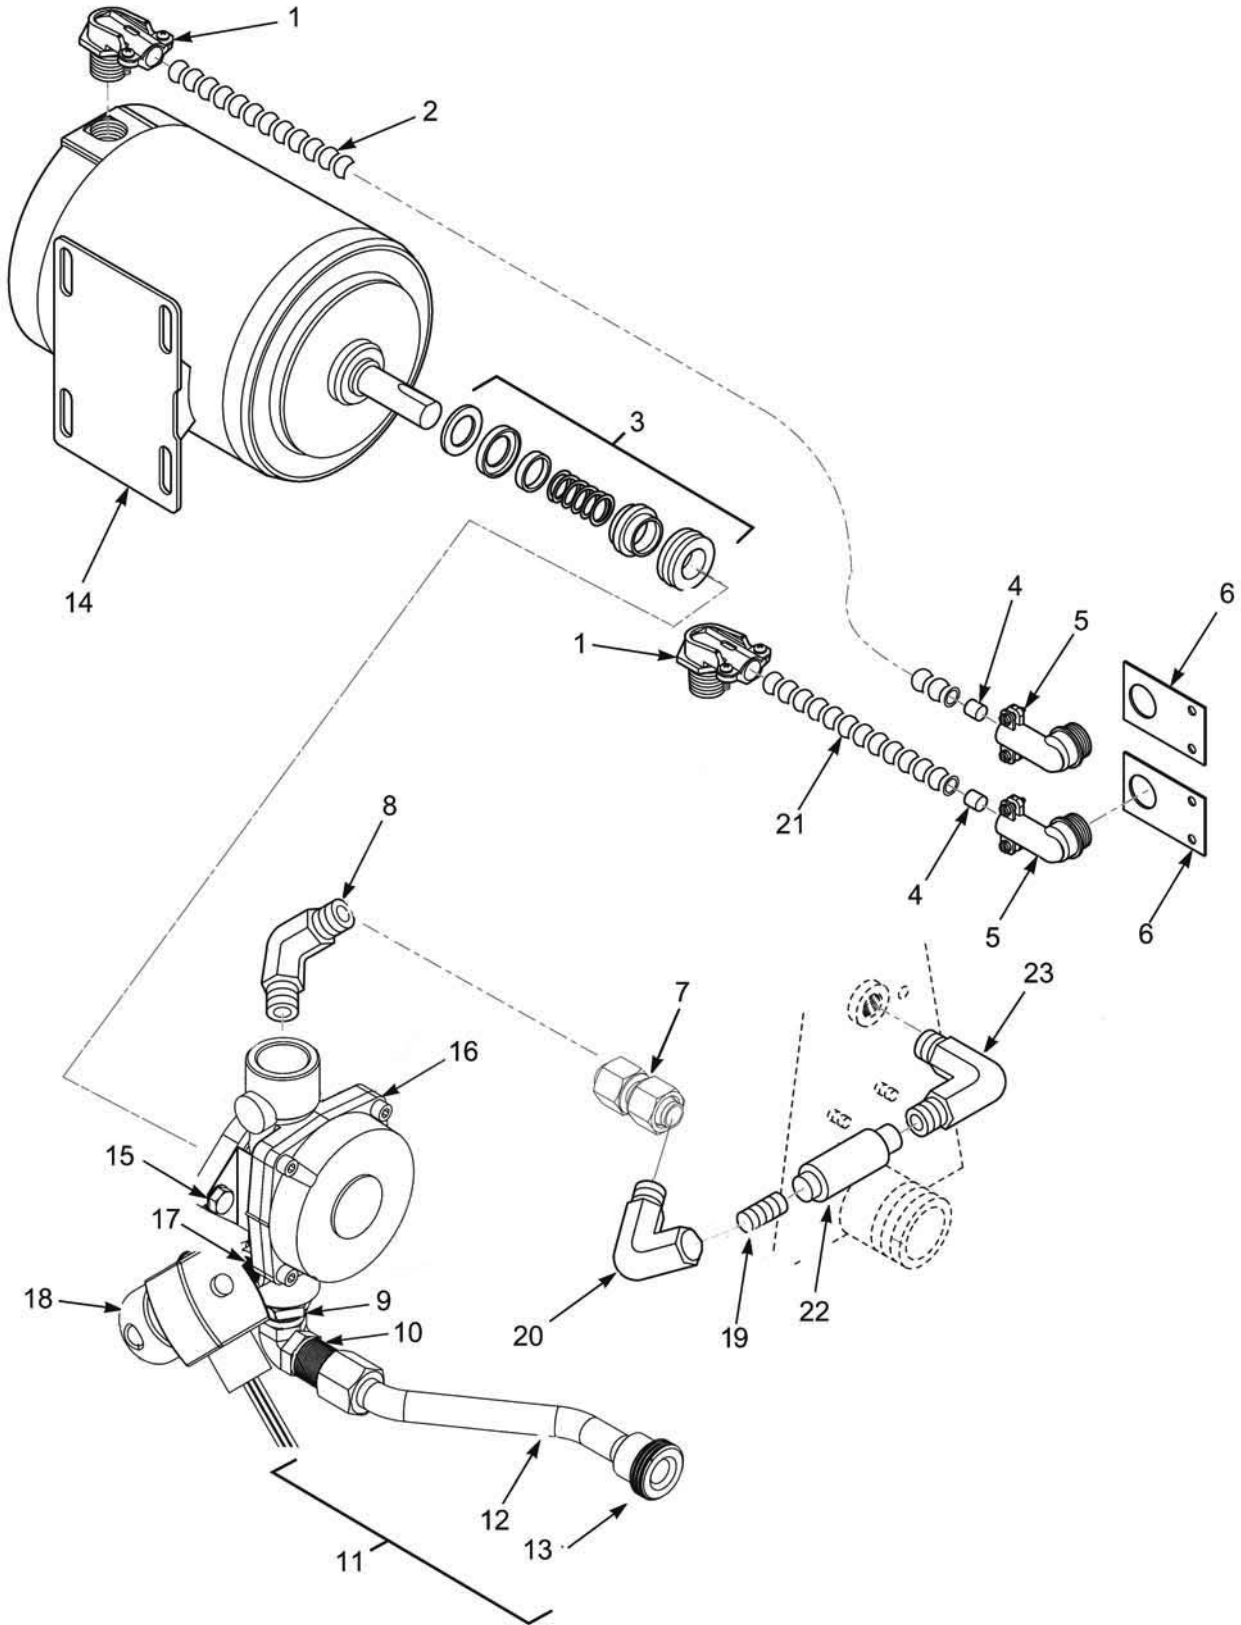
B. Filter Pump Assembly (SN: LH016JC and above)
